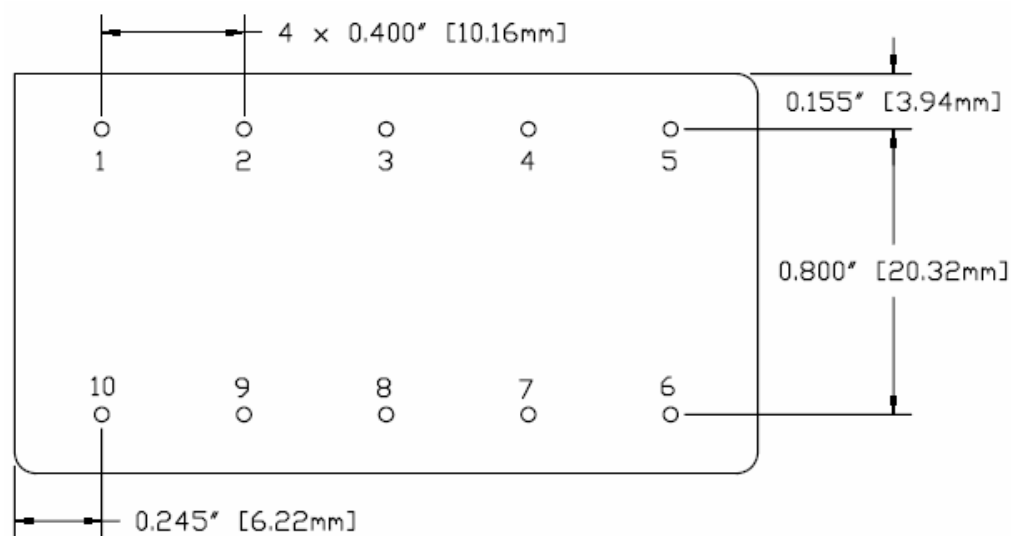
Non-Flanged, Solder Seal Tin Plated Package and Pinout (Not Used for /HB or Higher Screened Products)
